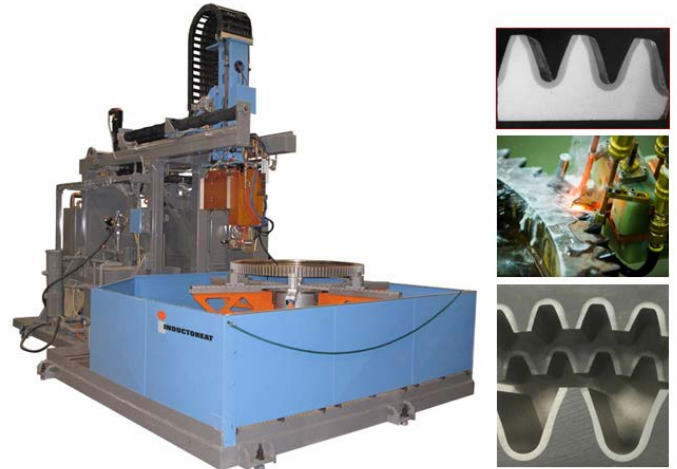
Tooth-by-tooth hardening of large gears. (Photo courtesy of Inductoheat Inc.)
